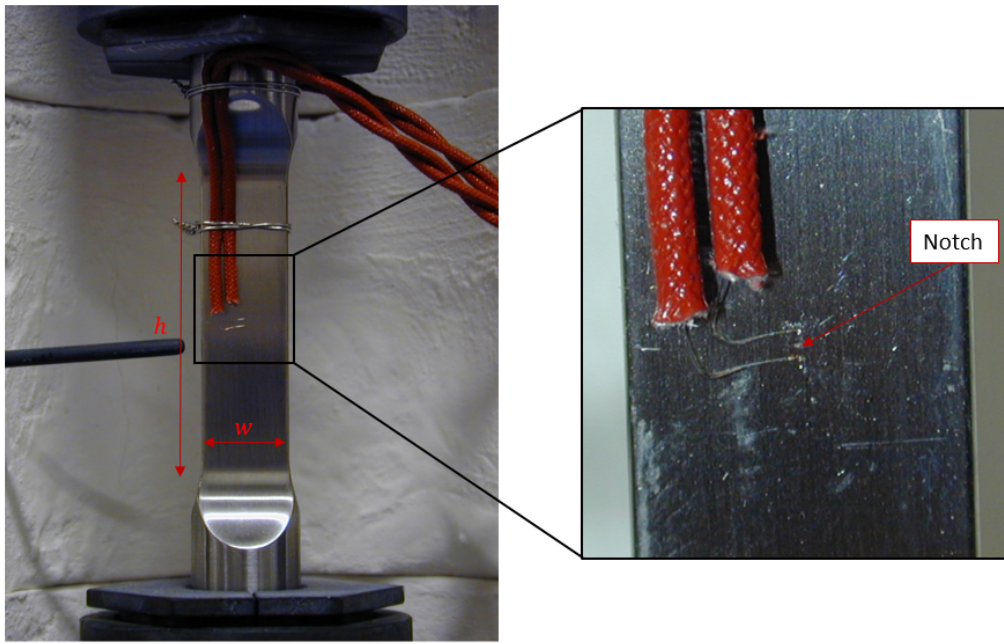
Illustration of Kb test specimen mounted in test machine. A notch is located in the middle of the specimen, as seen to the right
